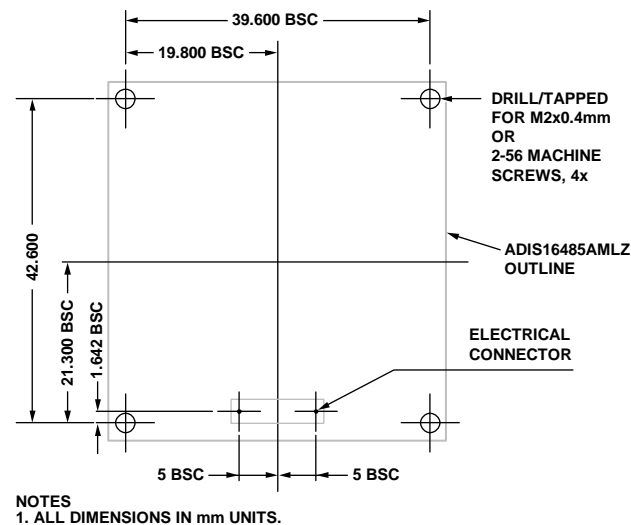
Suggested Layout and Mechanical Design when Using Samtec P/N CLM-112-02-G-D-A for the Mating Connector
